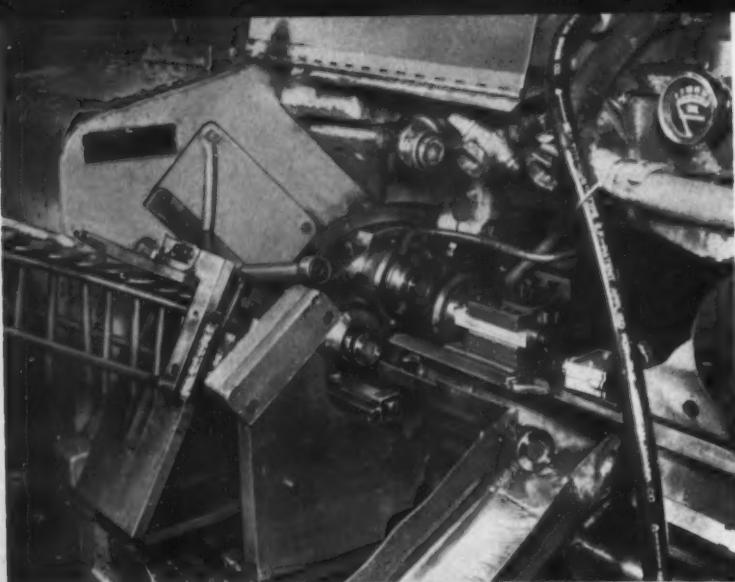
Valve heads are turned, faced, and chamfered on this six-station chucker, which is automatically loaded and unloaded.
